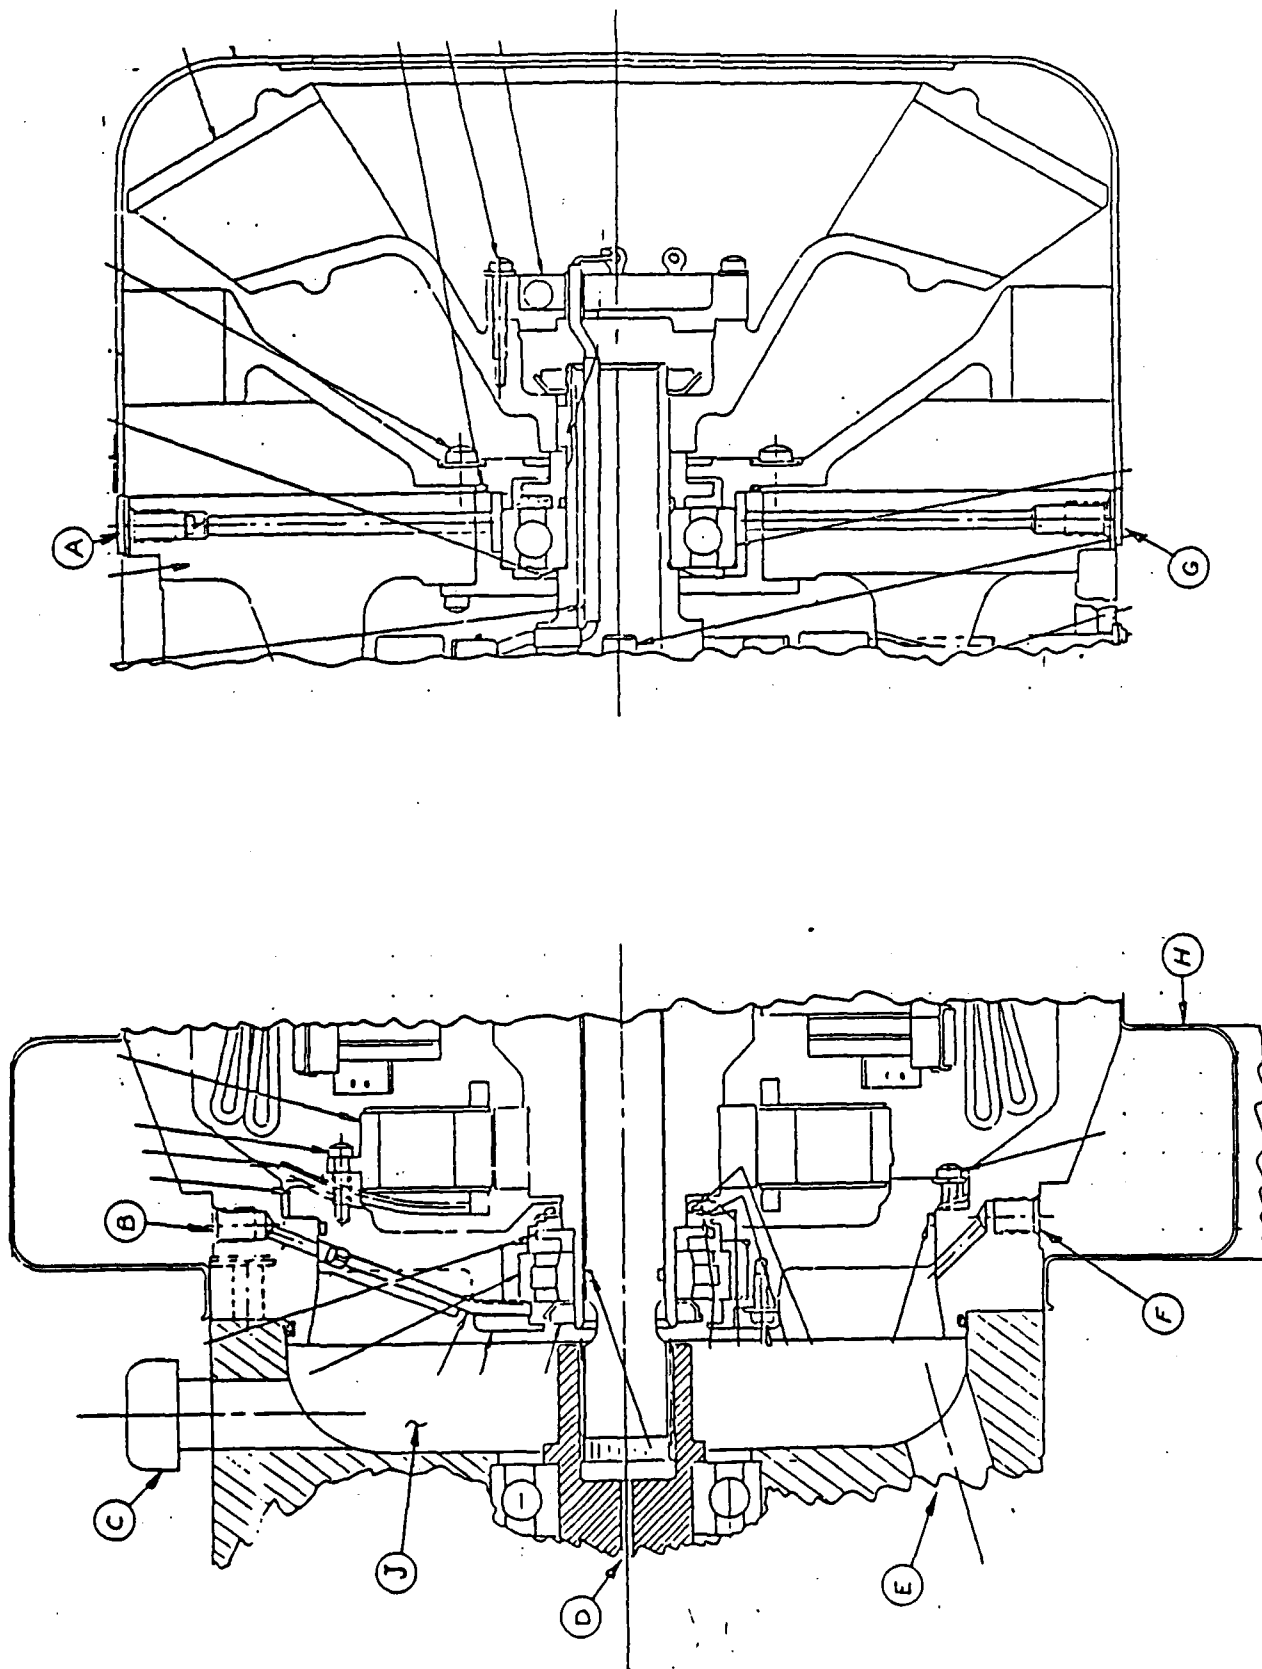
ALTERNATOR / GEARBOX / TYPICAL INSTALLATION
